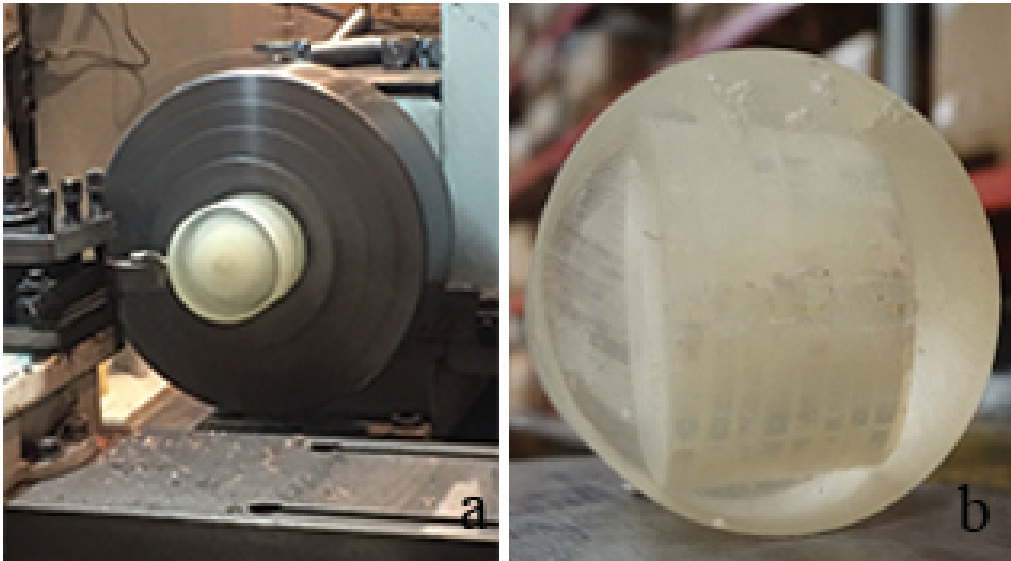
Molding phases: a) smoothing the surface to fit the impedance tube exactly, b) AMM prototype ready for measurement.
